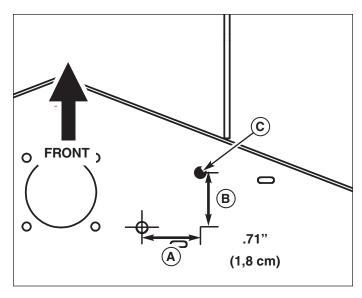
Drilling the New Hole for the Spring Anchor Bolt
